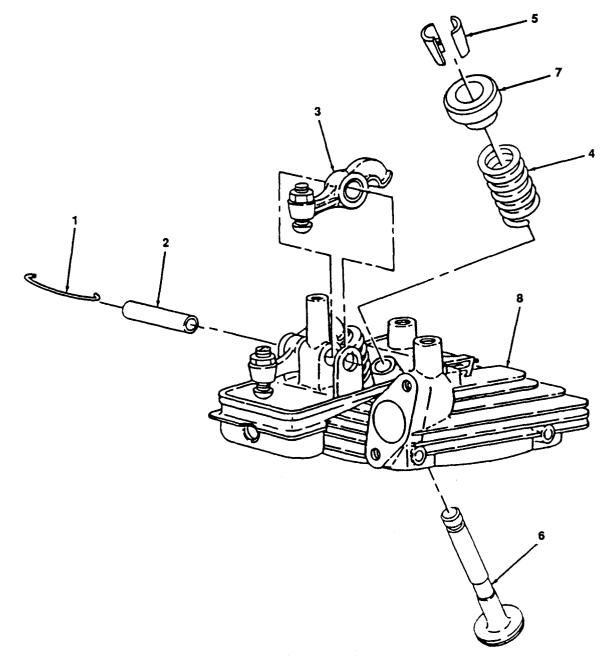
Intake and Exhaust Valves, Removal and Installation.
